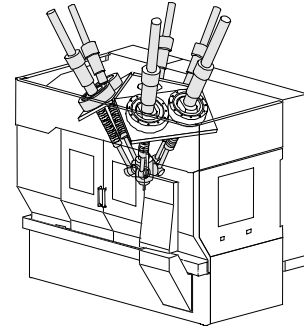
A Hexapod-type parallel kinematic machine tool, COSMO CENTER PM600.
